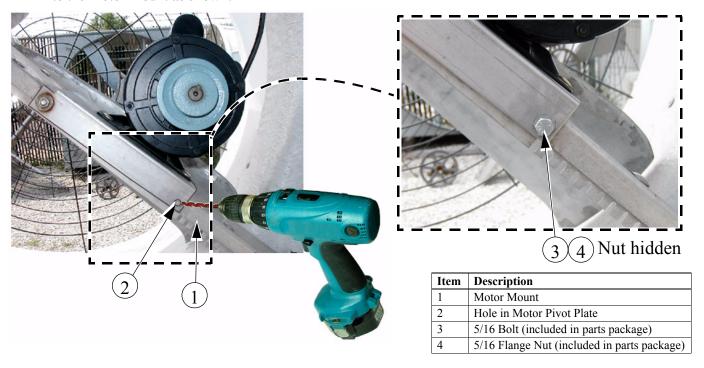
Drilling Hole in Motor Mount to attach Pivot Plate
